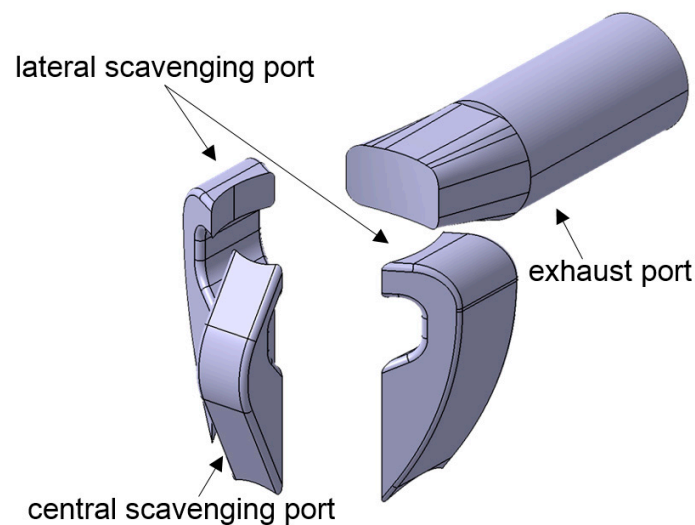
Ports' arrangement of the prototype engine scavenging system.
